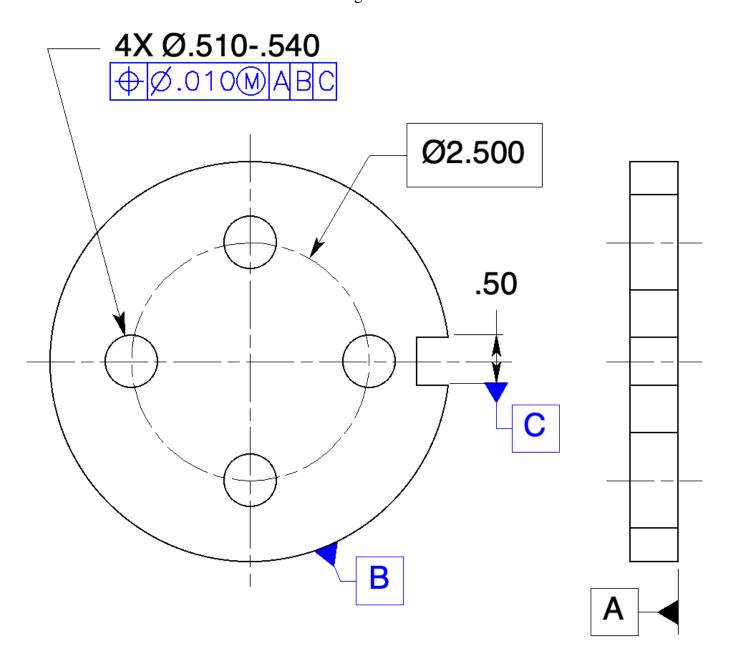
Datum feature of size: Questions 19 through 24. Geometric Dimensioning and Tolerancing for Mechanical Design
